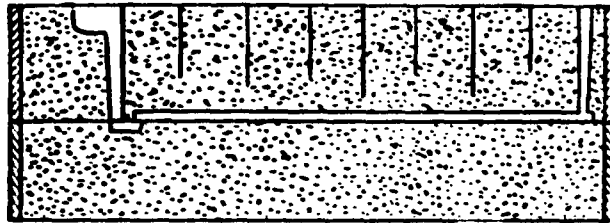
Cross section of a mold for casting flat thin-walled panels.
